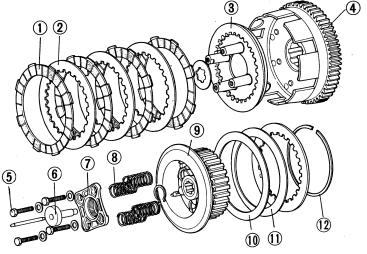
① Friction disc ② Clutch plate ③ Clutch pressure plate ④ Clutch outer ⑤ Clutch lifter rod ⑥ Clutch lifter guide pin ⑦ Clutch lifter plate ⑧ Clutch spring ⑨ Clutch center ⑩ Disc spring seat ⑪ Clutch spring disc ⑩ Set ring (82.5mm)
